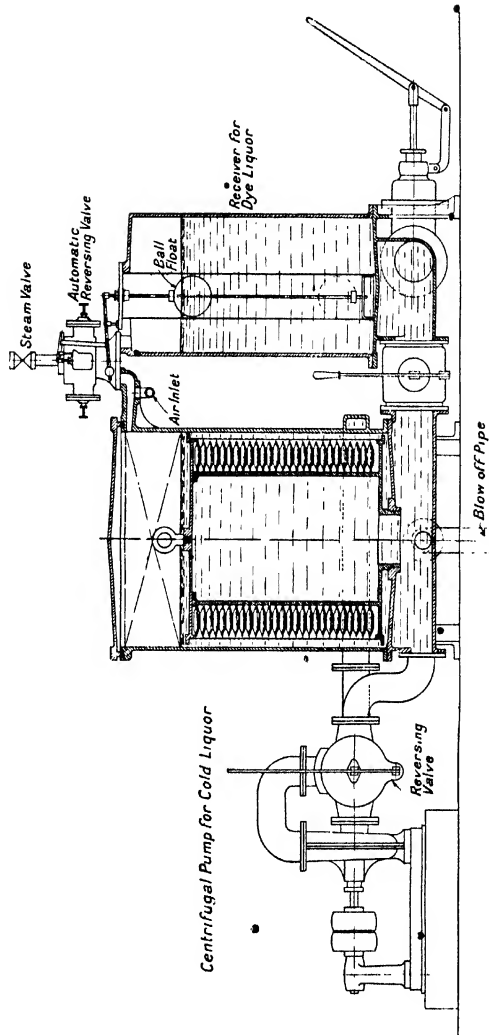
Patent Cop Dyeing Machine (Mather & Platt).
